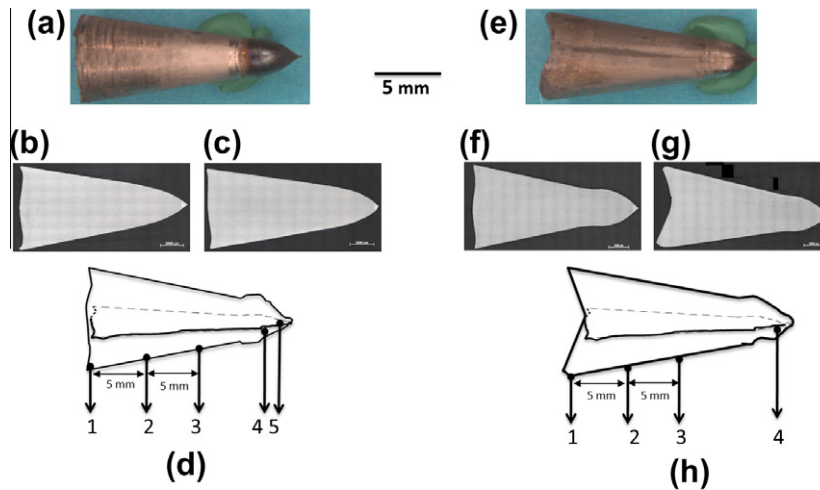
Macroscopic shape details in deformed specimens. (a–d) TT case. (e–h) IP case.
